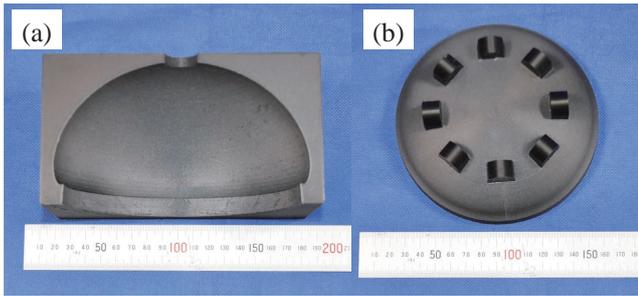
(a) The mold for producing head shape silicone rubber. (b) The mold for grooving the bottom of the head.
